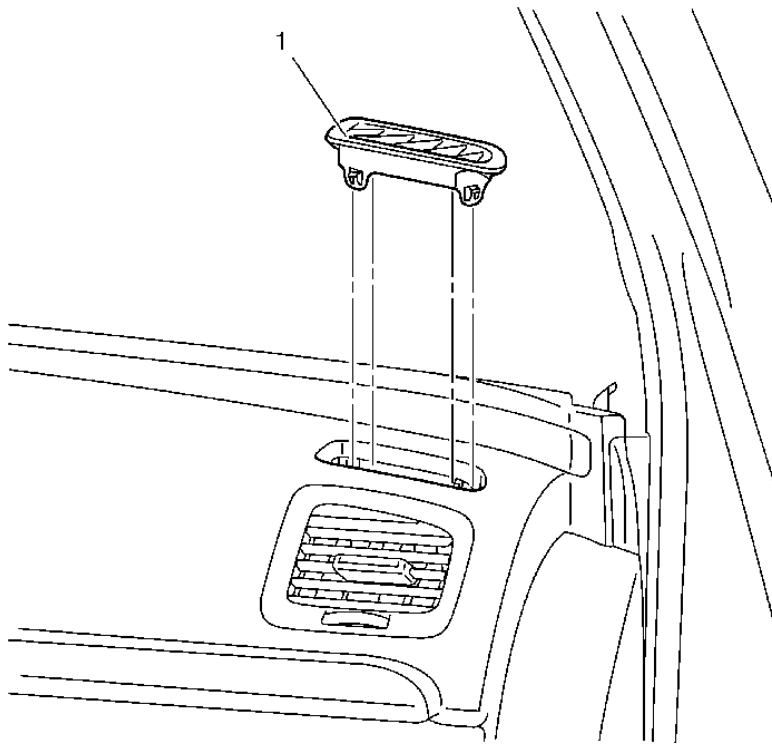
Side Window Defogger Outlet Grille - Right Side
